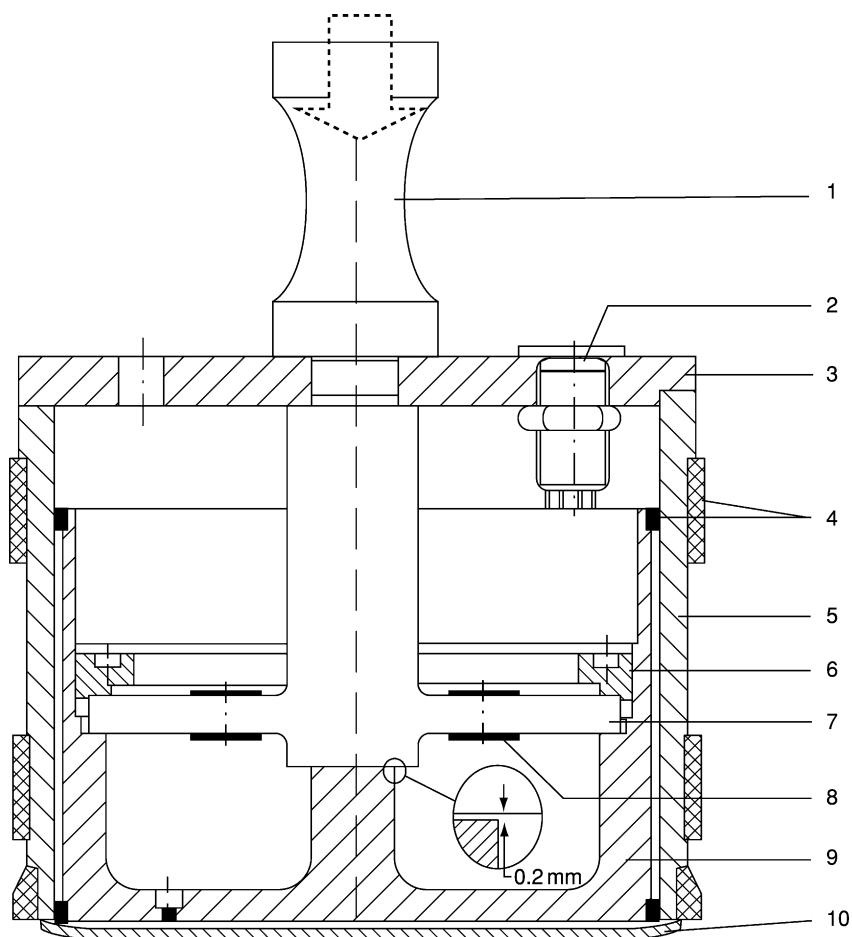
Device for measuring piston pressure; used with compression cell in place of the standard piston. 1, Pressure knob; 2, miniature receptacle; 3, cover; 4, PTFE rings; 5, guideway; 6, threaded ring; 7, beam; 8, resistance strain gauges; 9, piston; 10, thin foil (drawn to enlarged scale in figure) (from [Ehlermann and Schubert, 1987](#)).
